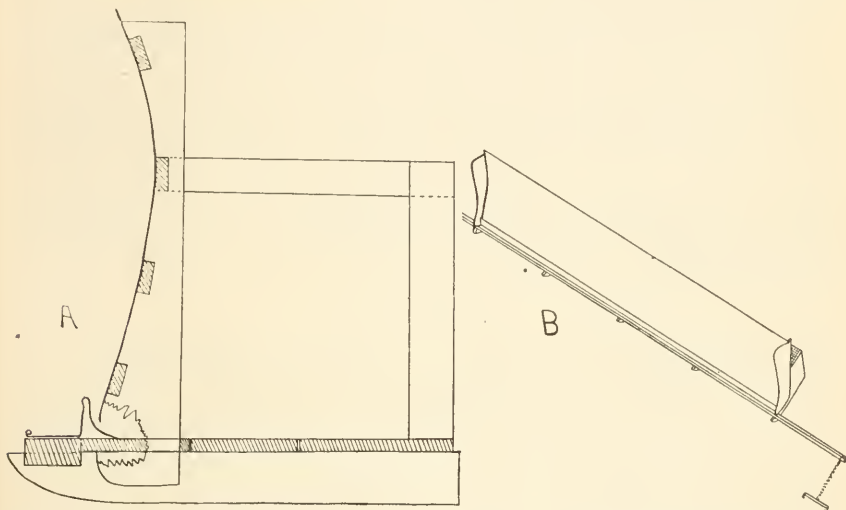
A. An end view of the grasshopper machine showing construction. (Front upright cut out to show curve of catching device.) B. Front view (reduced) to show attachment of runners and horses.
